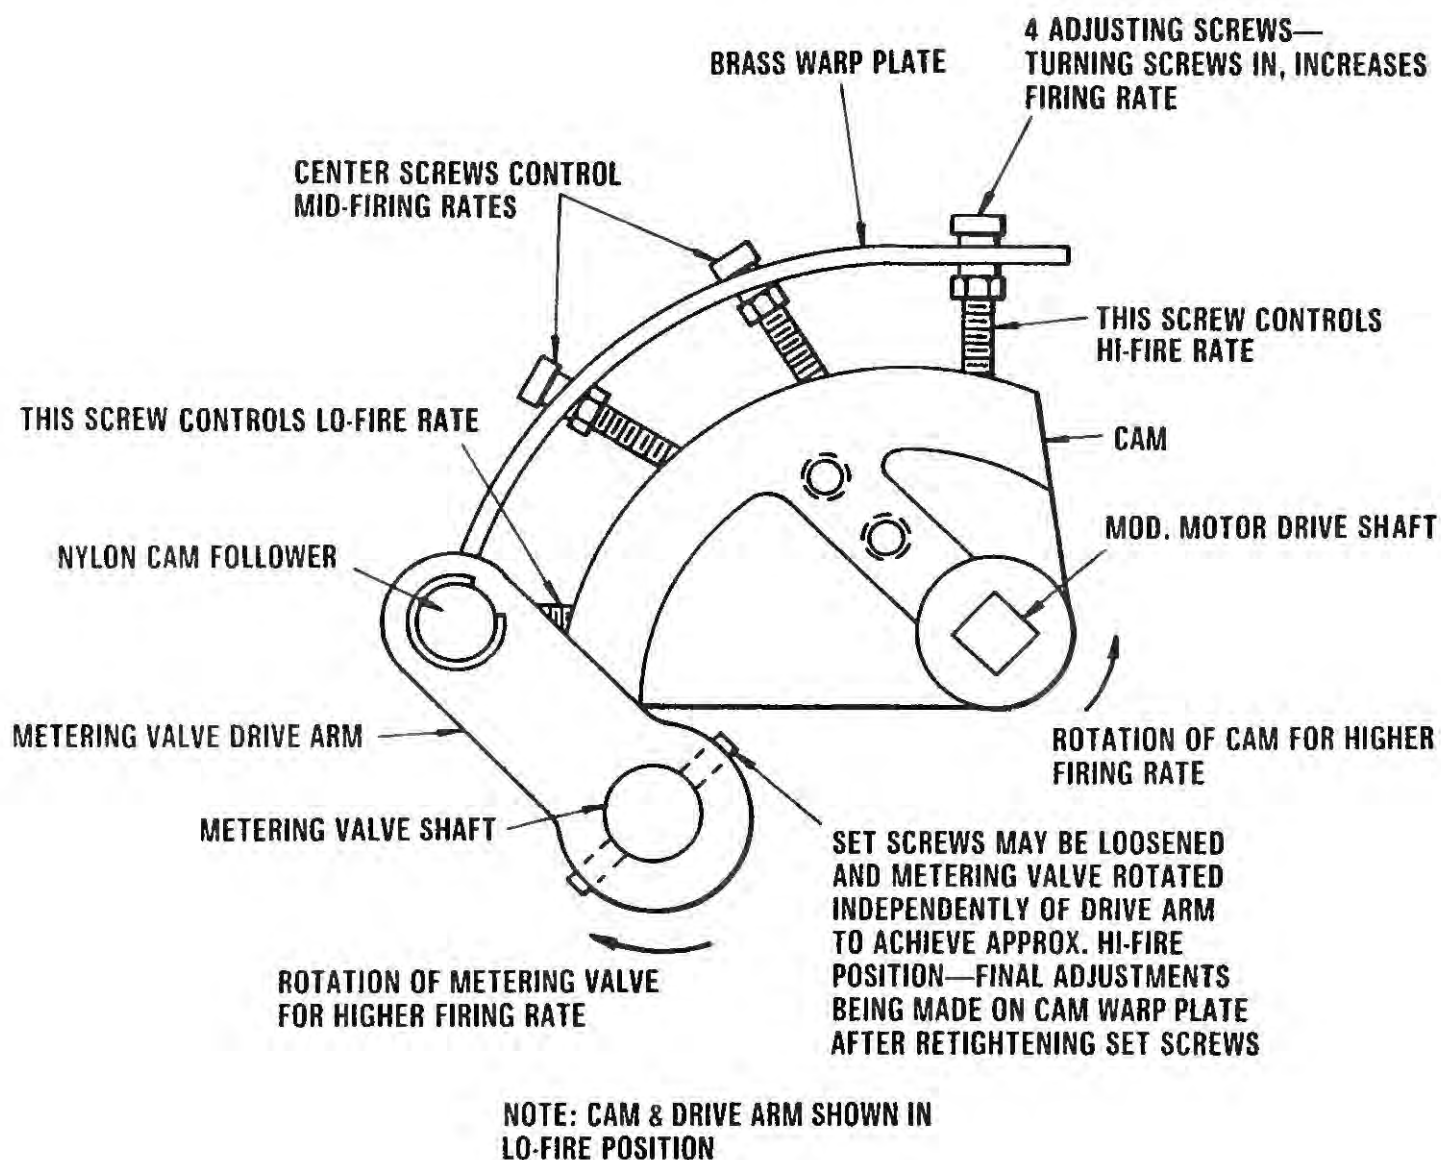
OIL METERING VALVE DRIVE ADJUSTMENTS -
